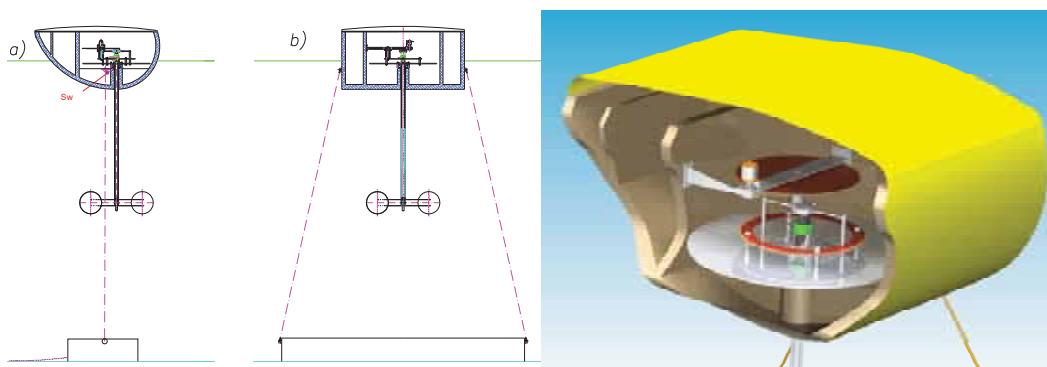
Construction solution of the buoy: a) – longitudinal section, b) – cross section and on left side – 3 D longitudinal section
